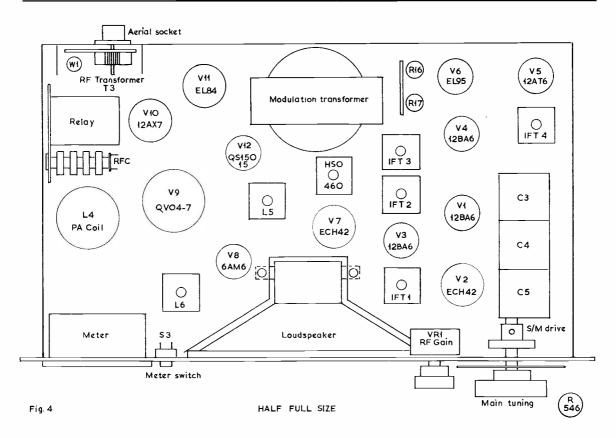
Upper chassis arrangement of parts, Mobile Transceiver.
